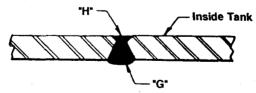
Butt joint. Weld "G" to be laid in V in beads not exceeding $\frac{3}{16}$ -in. deep. After "G" is built up above plate on outside, the inner surface must be gouged out sufficiently to remove all scale and slag. Weld "H" is to be built up above the surface of plate, peened and ground flush.
